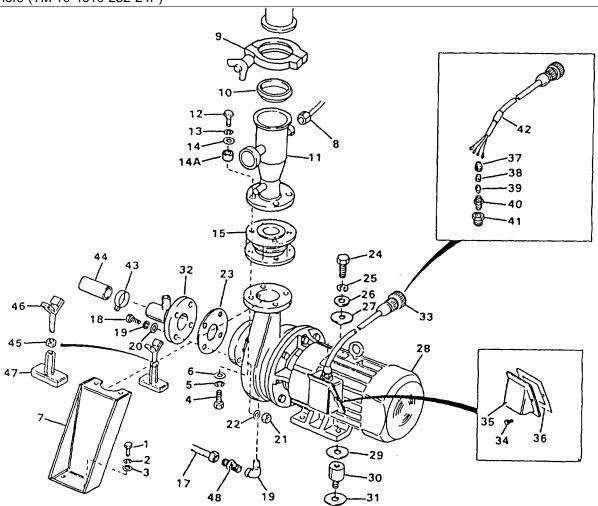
Booster Pump Motor Assembly (sheet 1 of 2)
